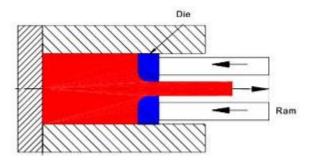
Indirect Extrusion – In Industrialextrusionmachinery
